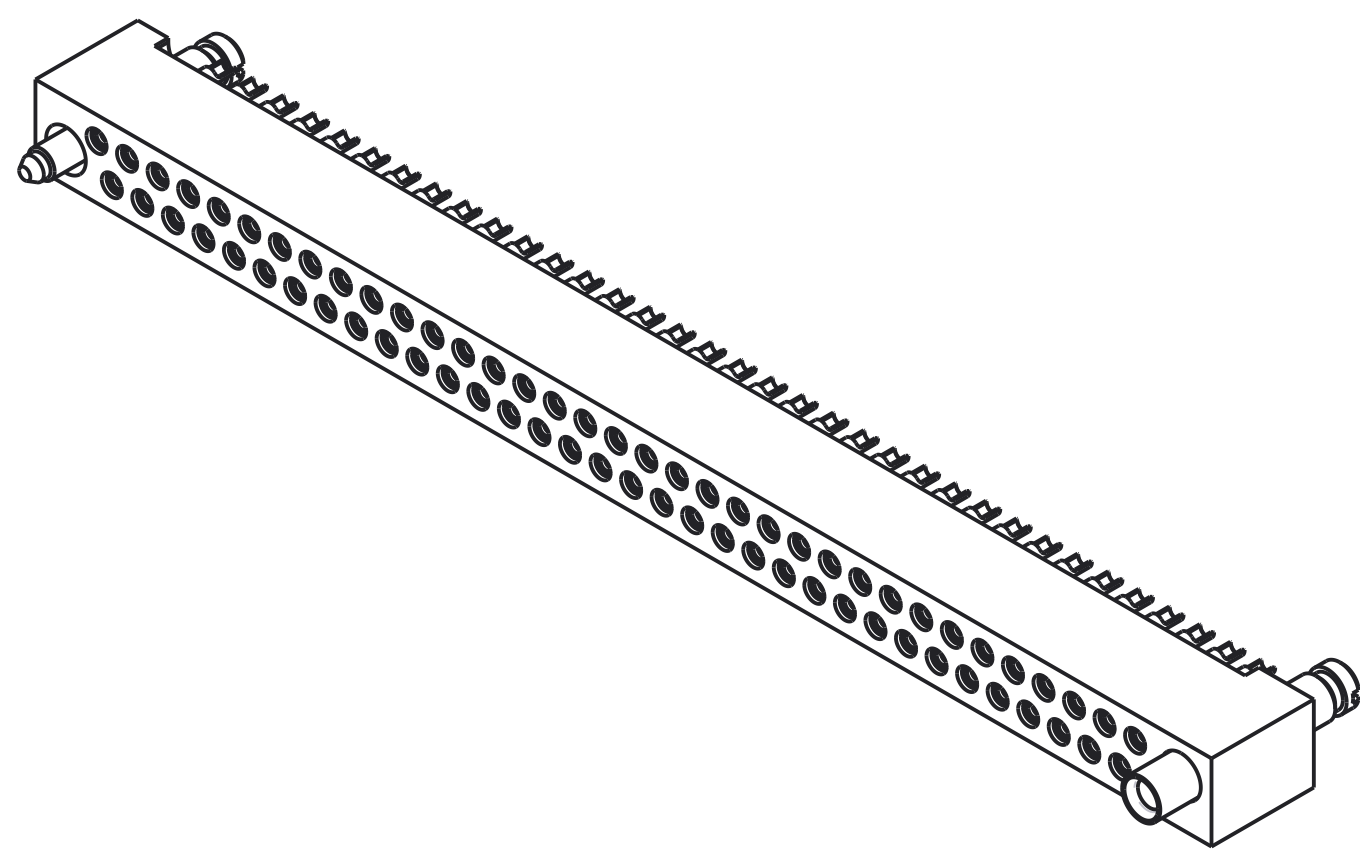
RECEPTACLE CONNECTOR, SOLDER CUP SOCKET CONTACTS
